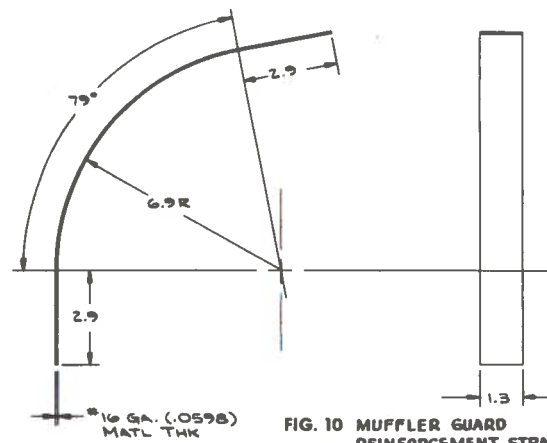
MUFFLER GUARD REINFORCEMENT STRAP
